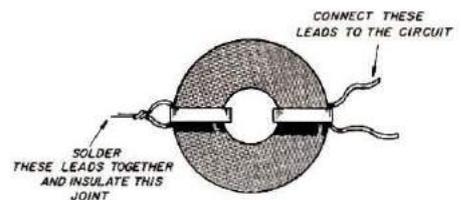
The 88-mH toroids you buy as surplus usually have four wires coming from the windings. Connect two of them together, solder them, and insulate them with tape before you mount the coil.
